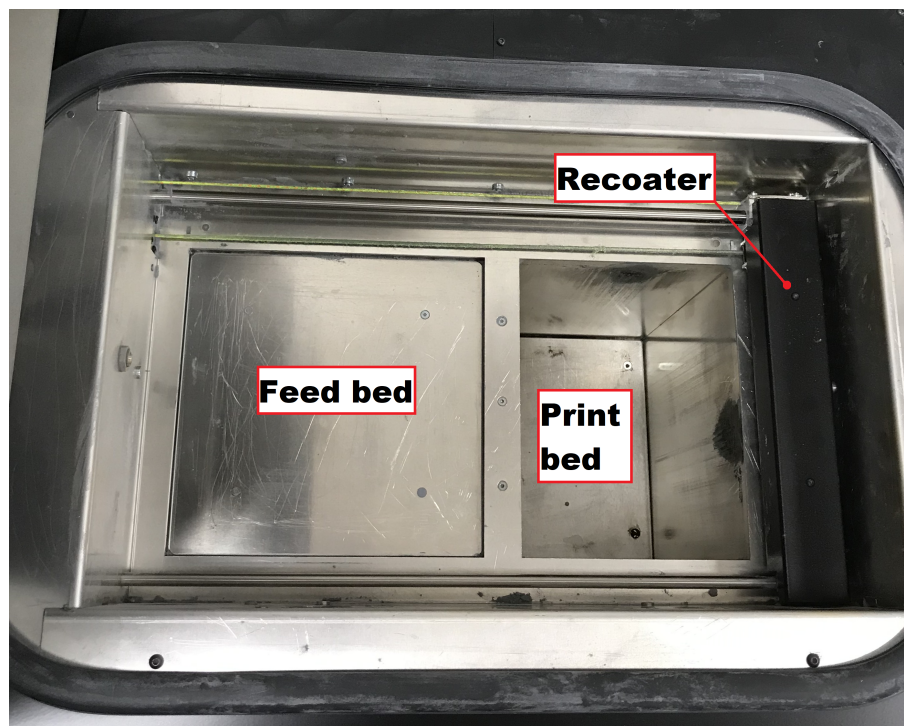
The inside of a 3D printer printing with SLS technology, a feed bed for powder filling, a print bed for printed samples and a recoater for spread the powder.
